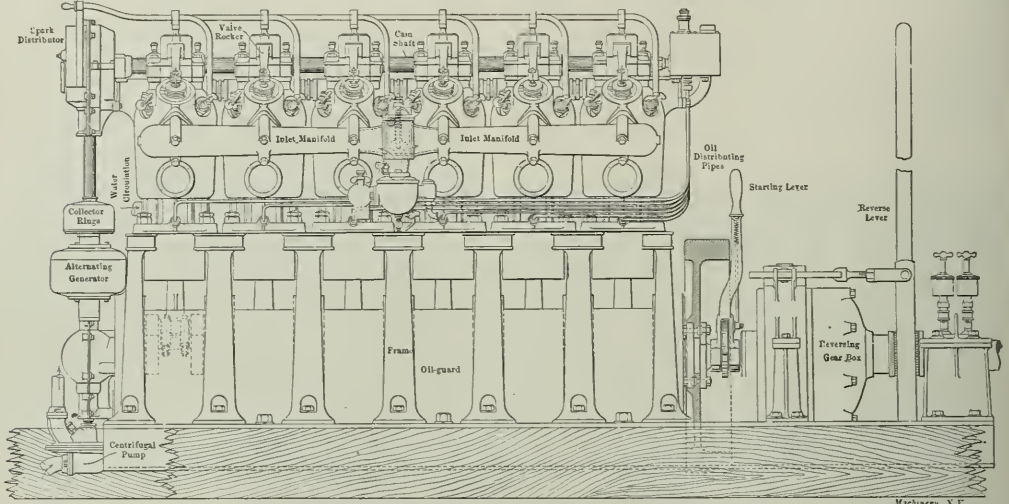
Side Elevation Hurd & Haggin Six-cylinder Engine, showing the Inlet Manifold.
